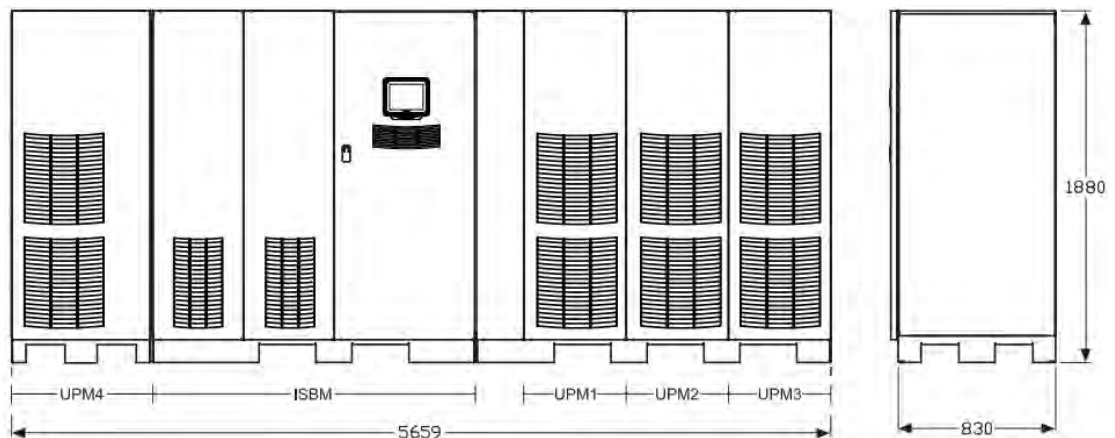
SUPS cabinet dimensions - Front and side view (Eaton Corporation)
